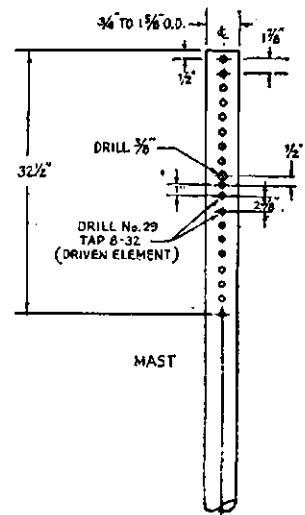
Sketch showing drilling pattern of the mast. Except as indicated, holes are made with a No. 43 drill and tapped for 4-40 machine screws, and are spaced $1\frac{1}{2}$ inches apart. The mast section should be of aluminium or steel, and at least 5 feet long.
